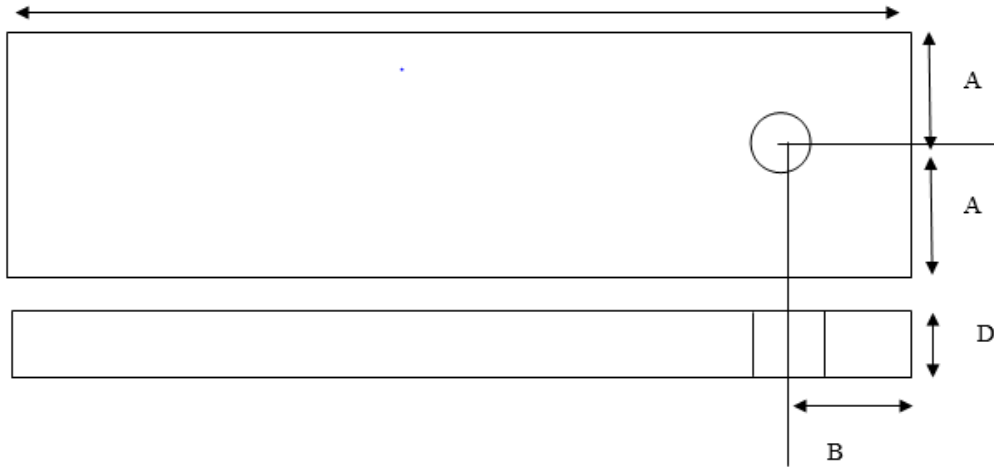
Dimensions of specimen for bearing strength test according to ASTM D 953
